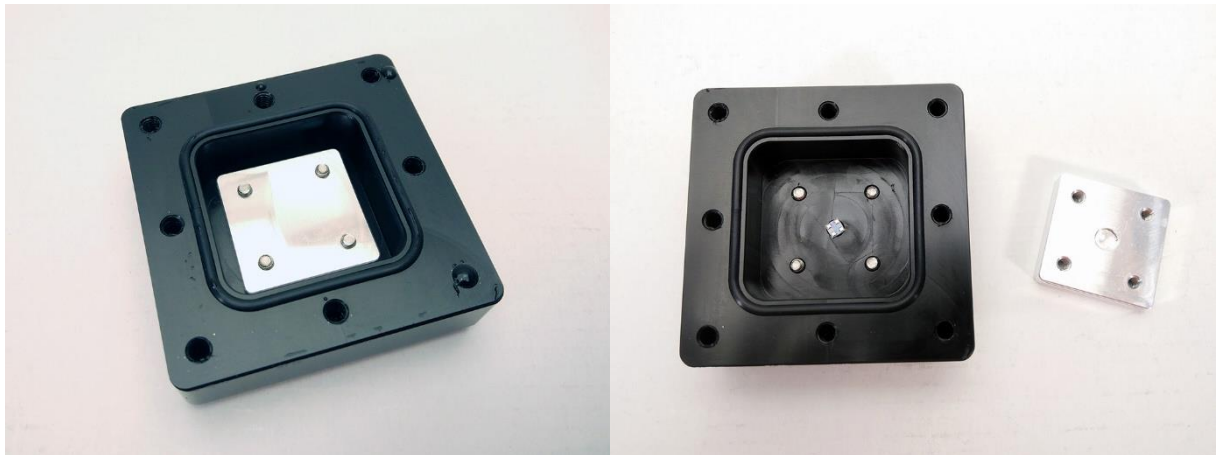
The second test with a new pressure sensor and the correct O-ring size. The case stayed completely dry.
